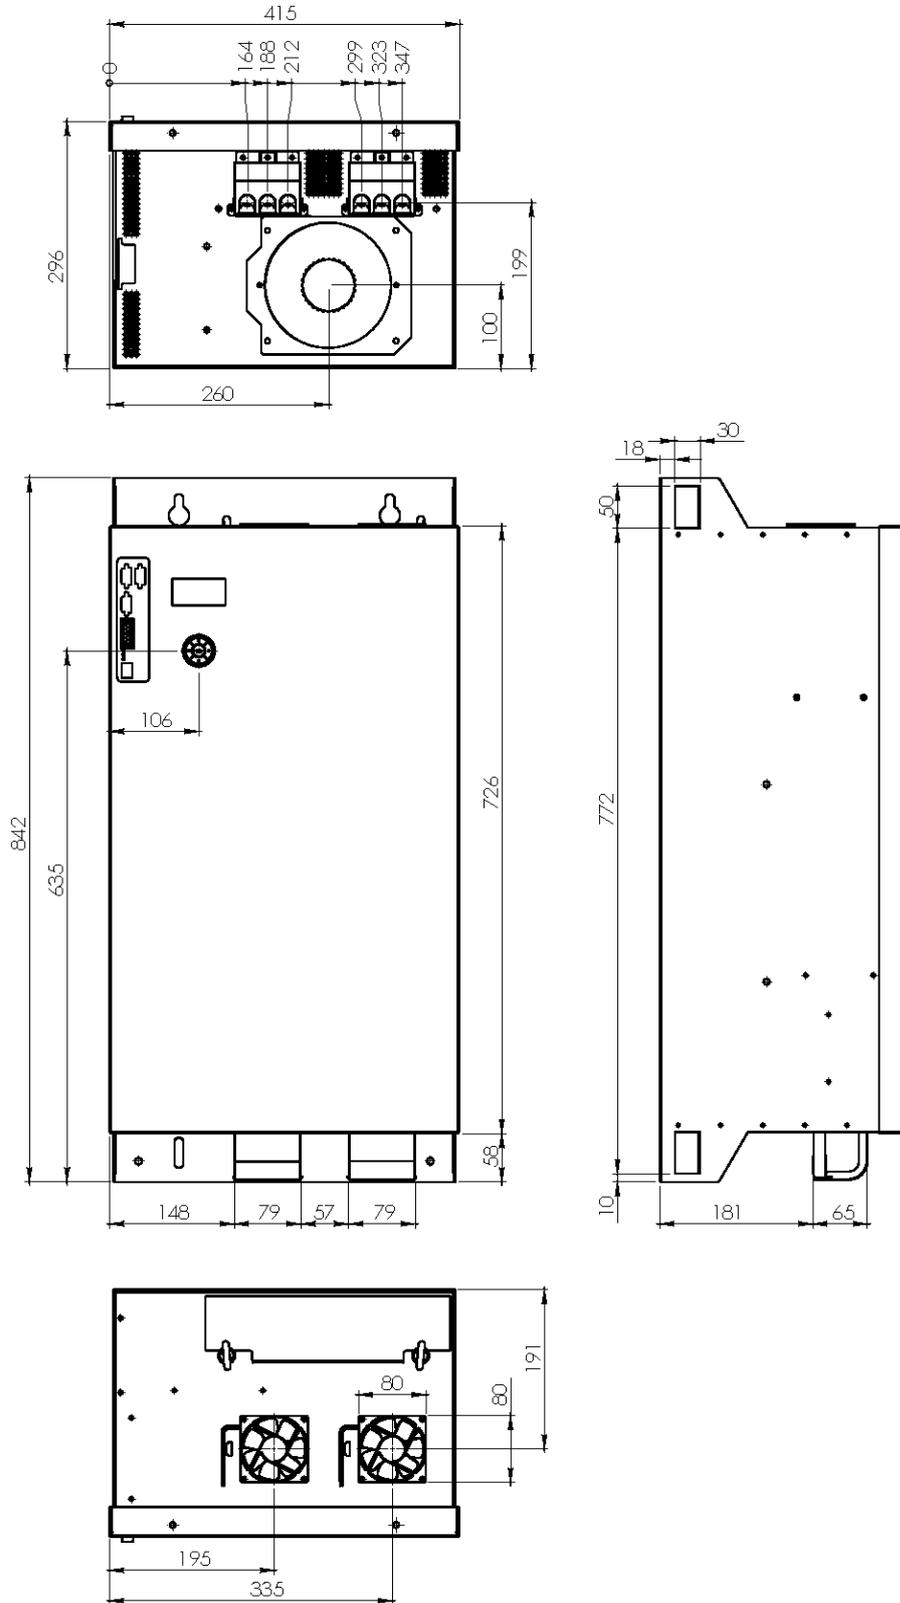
Dimensional drawings ECOsine® active FN3430-030/060-xxx-4
